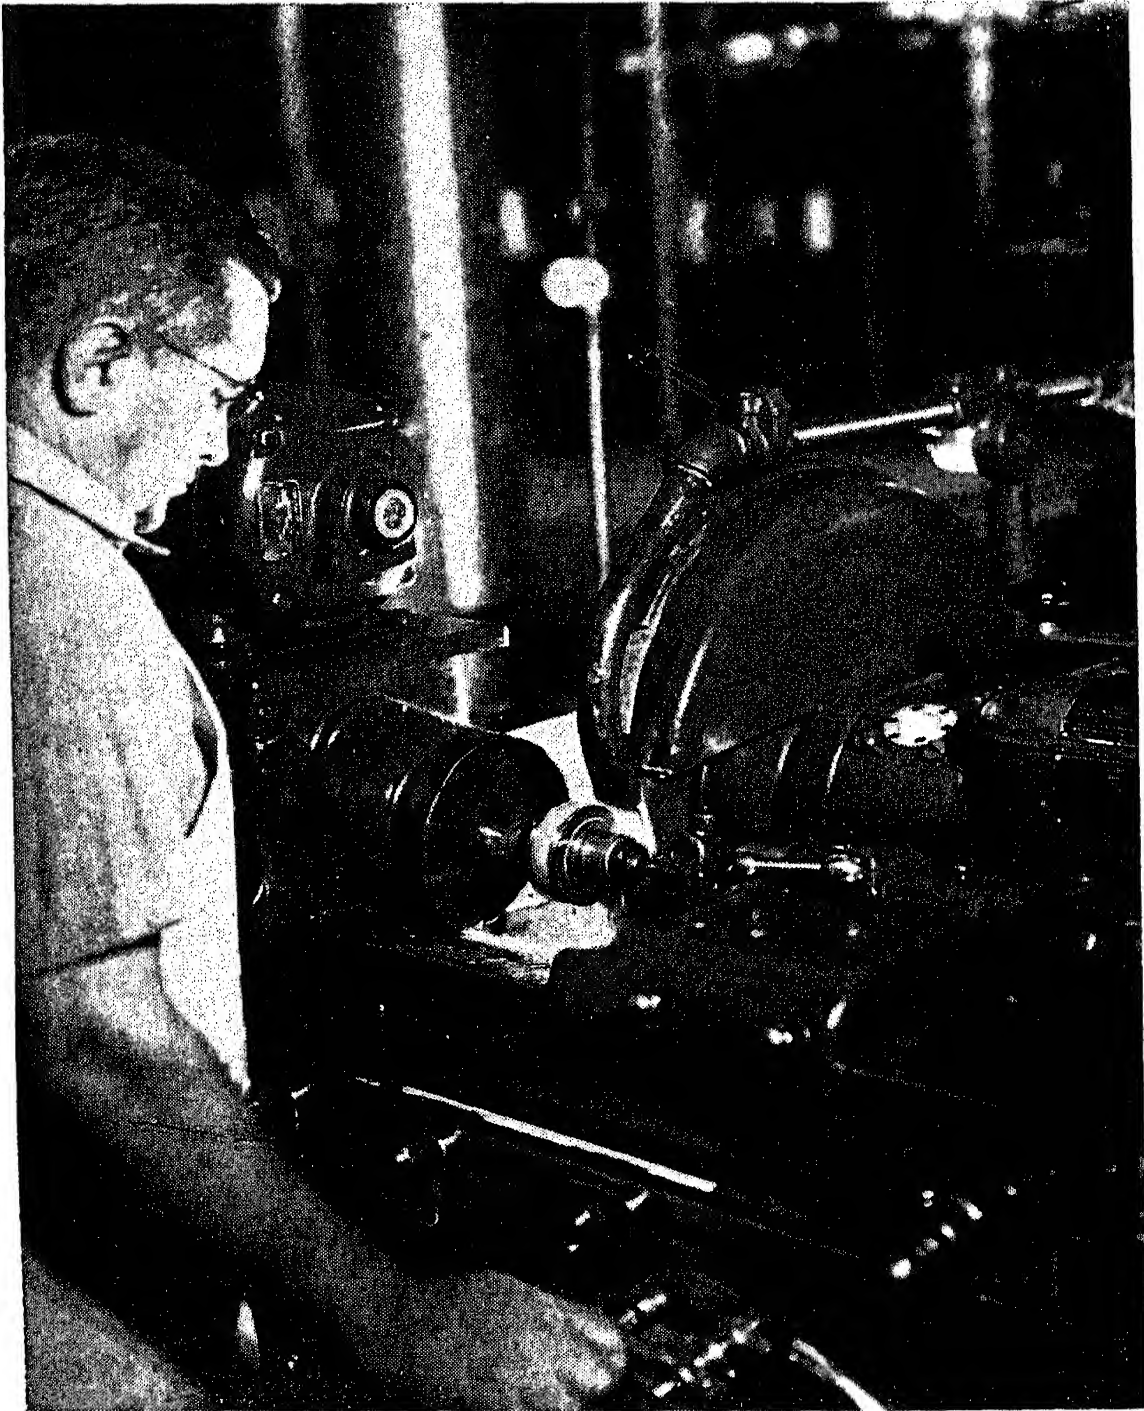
A plain cylindrical centertype grinding machine in operation. (Courtesy Norton Co.)
